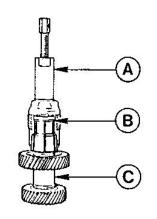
Fit input shaft bearing in front transmission housing (shown with Special Tool 15-064).
